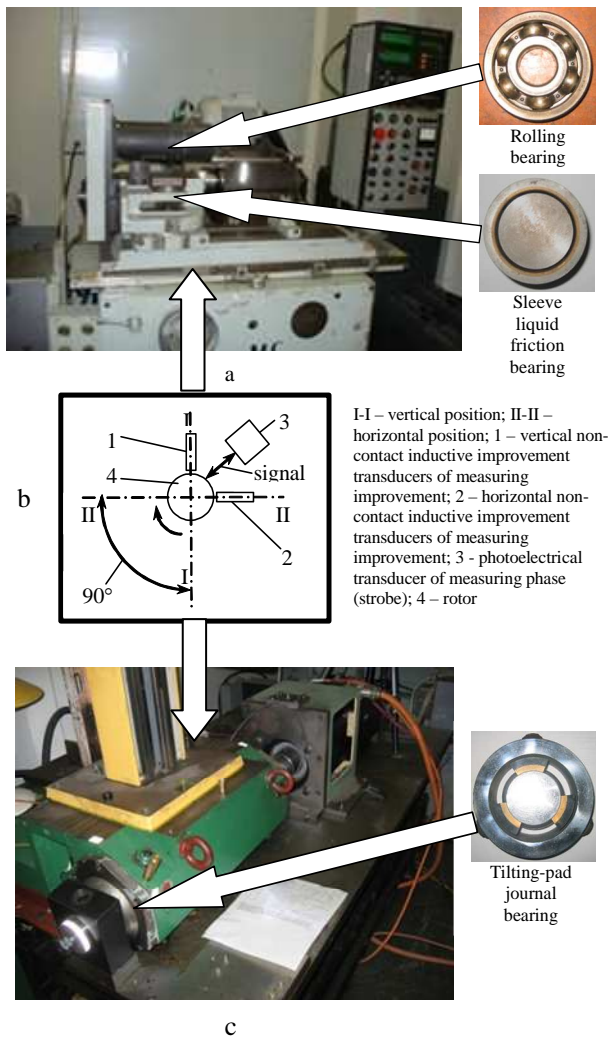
Rotor components of technological machines: a – with rolling and sleeve liquid-friction bearings, b - principal scheme of transducer of measuring exposition to measure c – with tilting-pad journal bearings
